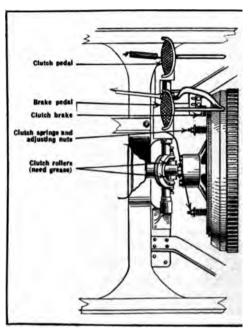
Clutch Control Assembly of Overland Automobiles.
